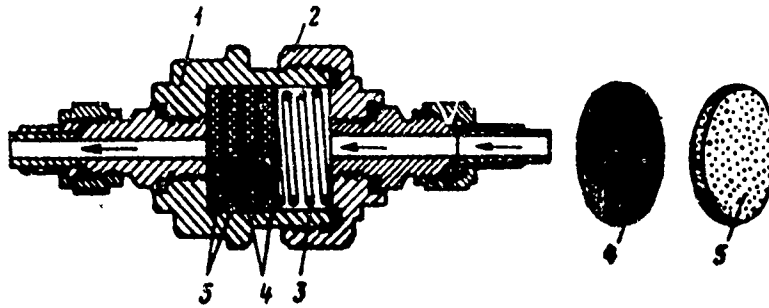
Direct-flow filter: 1 - housing; 2 - cover; 3 - spring; 4 - screen; 5 - gasket.
